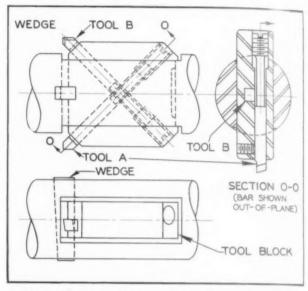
shows a block inset containing two tool-bits. The cutting faces of both tools are on the center-line—that is, the tools cross over-and-under. The heel of the block fits symmetrically milled flats on the bar, while a wedge forces the block against the back of the slotted opening in addition to providing lateral alignment. The tool block shown is proportional for 5/16 tool-bits, and the holes are tapped for 7/16-20 adjusting screws before broaching. In place of the square broached holes, the block may be made in symmetrical halves, with both tool slots milled, and the halves joined by means of screws, rivets or welding.
